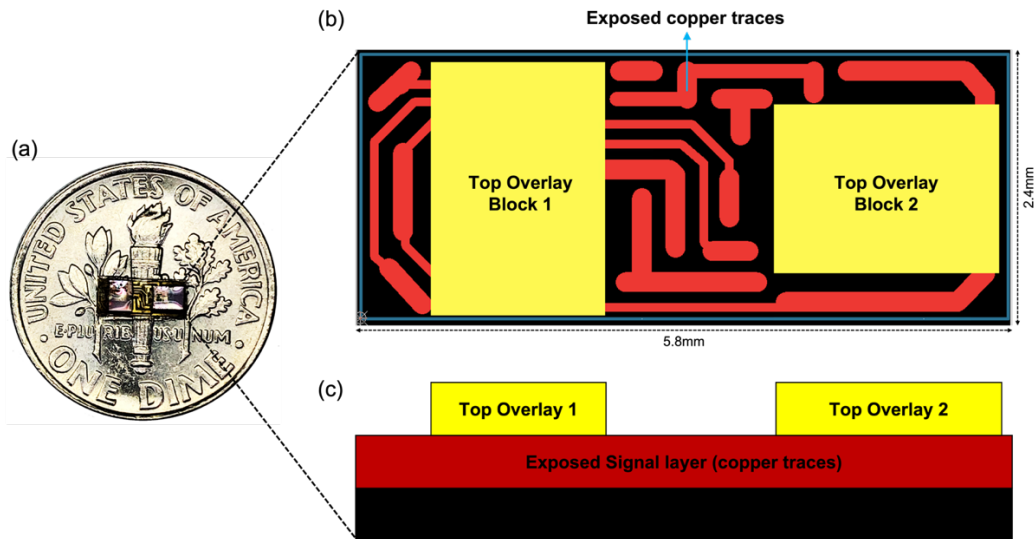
Assembled device on the flex PCB board. (a) Shown on top of a US dime for perspective. (b) Top-view of the flex PCB design showing the two Overlay blocks for placements of the two chips and the exposed copper traces for wire-bonding. The vertical dimension of the PCB was kept as small as possible to maintain compatibility for implantation in most commercial catheters. (c) Side-view of the PCB design.
